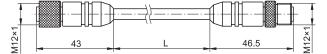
Connecting cable BSK-S103/GS203-CP-...
